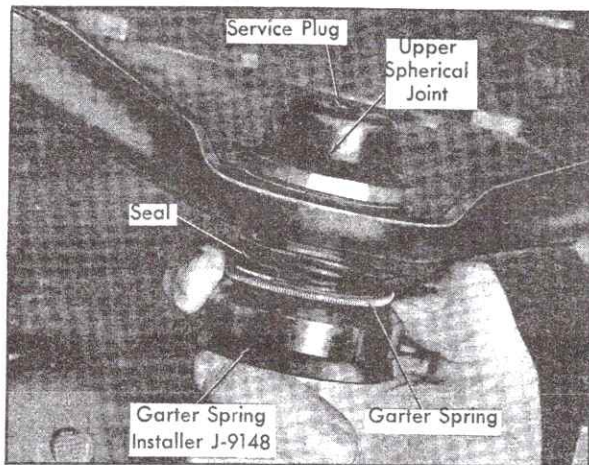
Installing Spring on Upper Spherical Joint Seal
